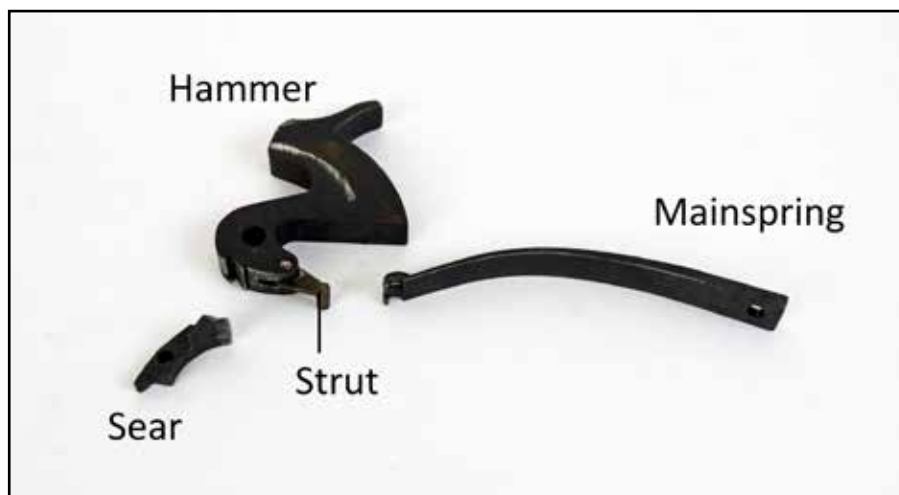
Parts of a lever-action FCG that could cause a failure to cock.
